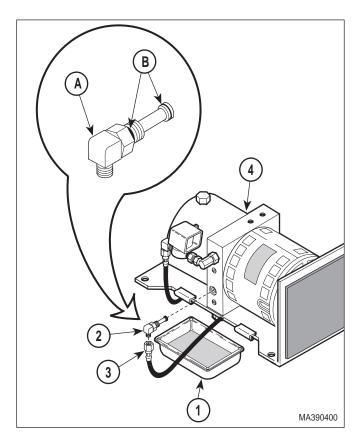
Up Function Shuttle Valve Removal / Installation
